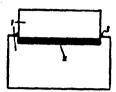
Schematic of joining blanks using soft iron powder: 1) Blanks being laminated; 2) interlayer of iron powder; 3) fillet weld after forging.
